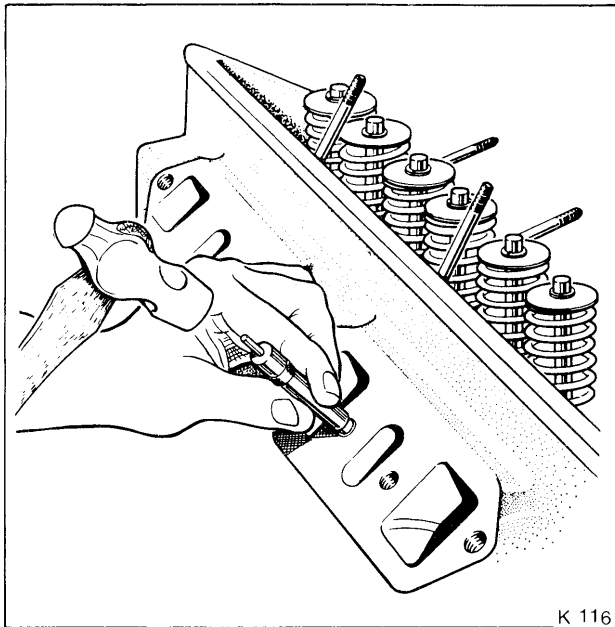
HELI-COIL TANG 'BREAK-OFF' TOOL
